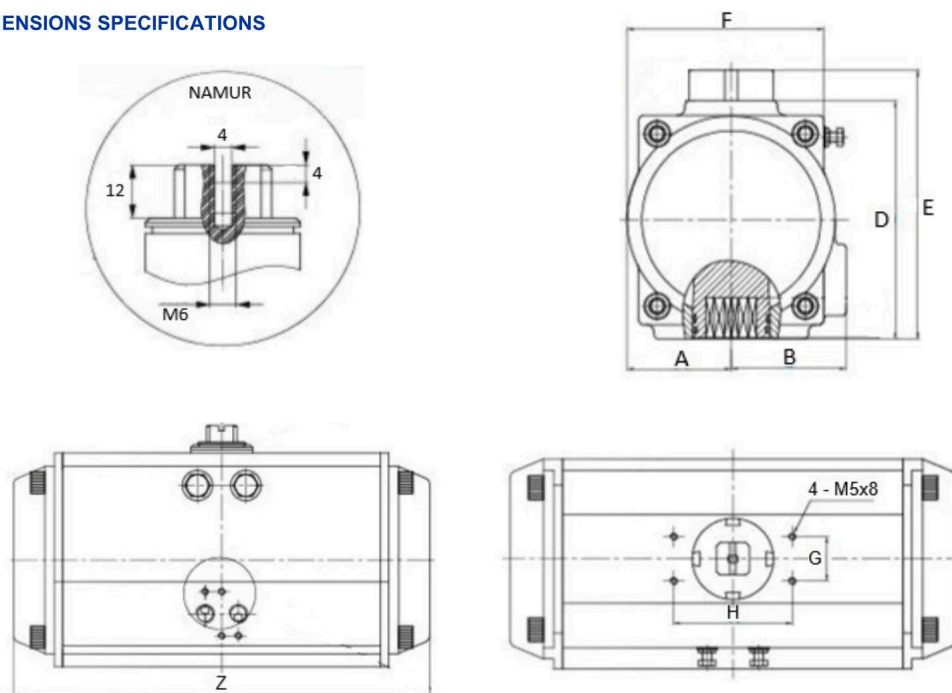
NAMUR accessory pad, end view (A, B, D, E, F), plan views (G, H, Z) and mounting threads.
